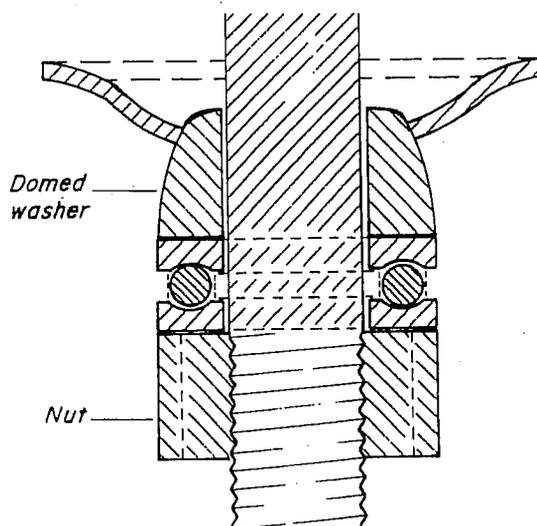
Schematic of Bolt Head Assembly and Thrust Bearing.
